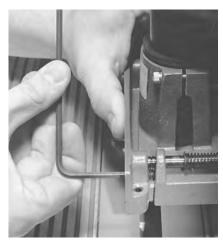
Adjust the depth-of-cut setscrews to match the biscuit size being used.
